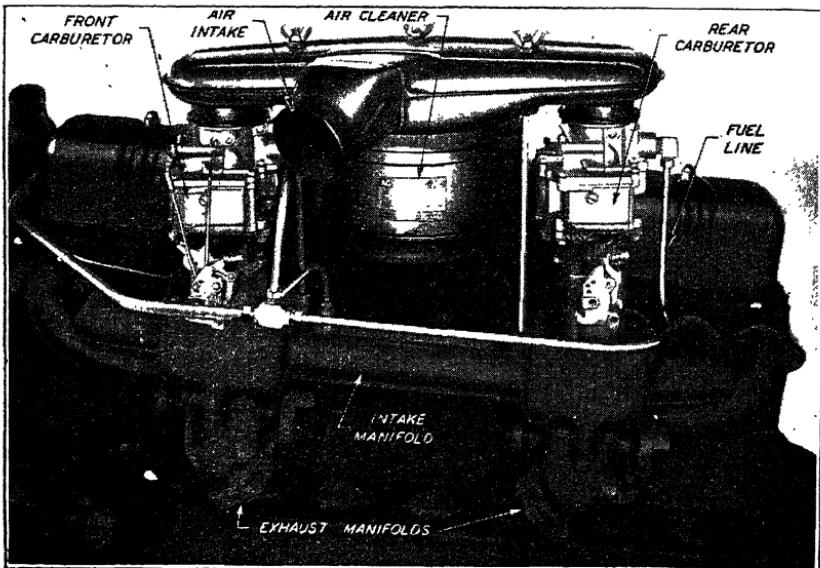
Buick 1941 Engine Equipped with Compound Carburetors
